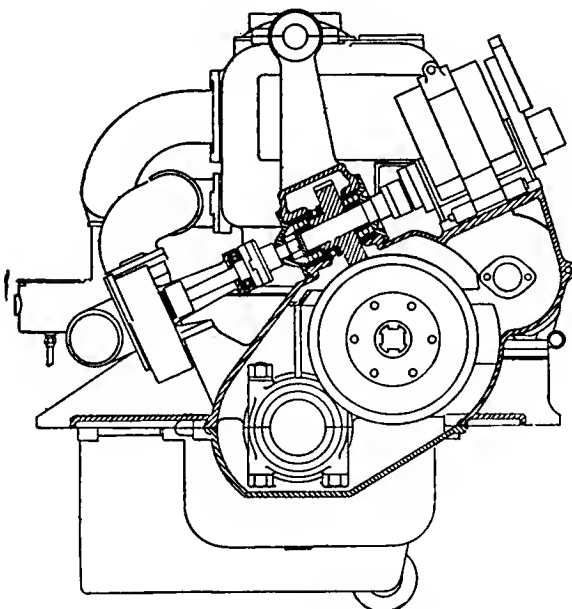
Cross-shaft pump drive in Pagefield motor. Fig. 16—Cross-shaft drive in White & Poppe motor
